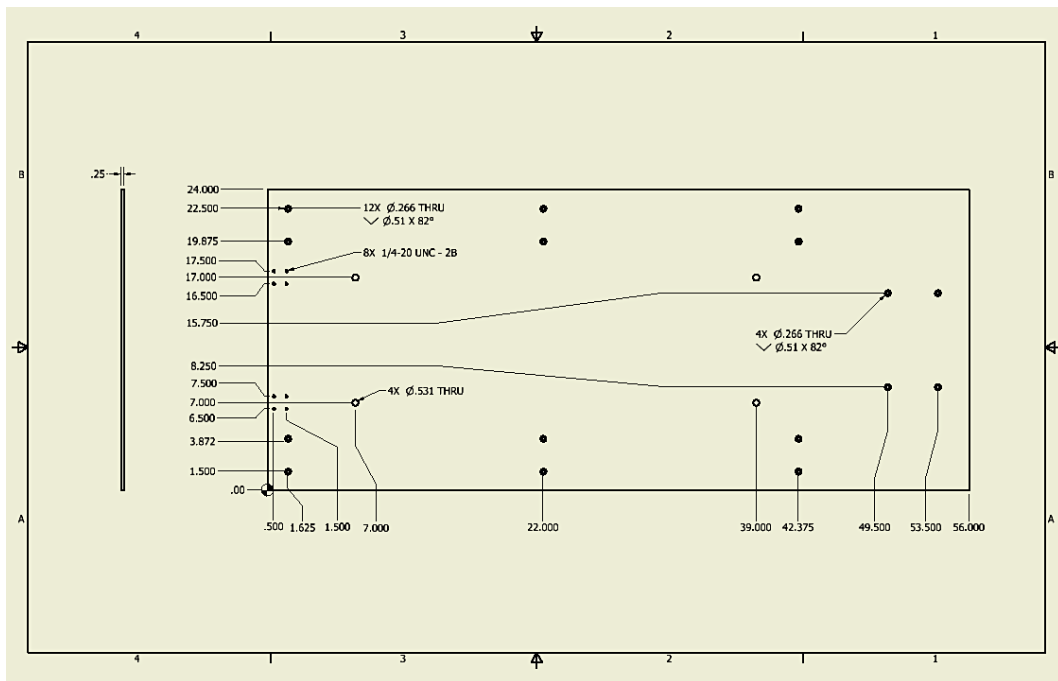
Dimensional drawing for aluminum plate under impact chamber
